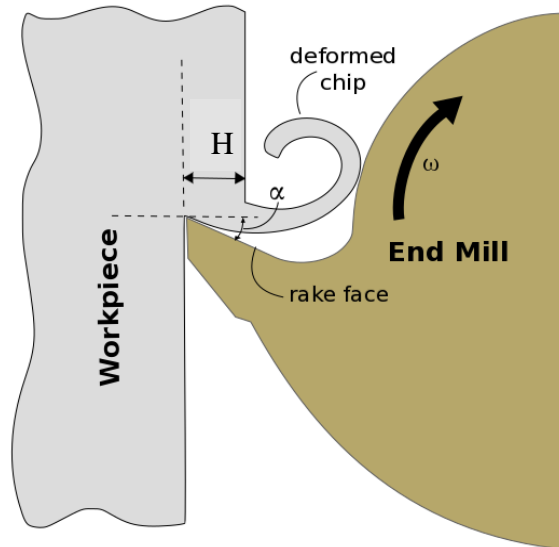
Illustration of a helical mill cutting a workpiece in 2D.
